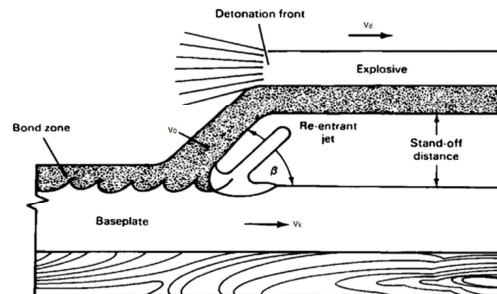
Flyer plate deformation during the welding process [4]
